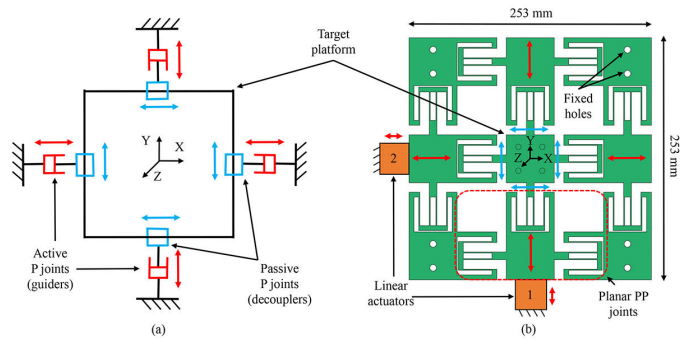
4-PP layout and its planar realization: (a) 4-PP layout; (b) planar CPM.
